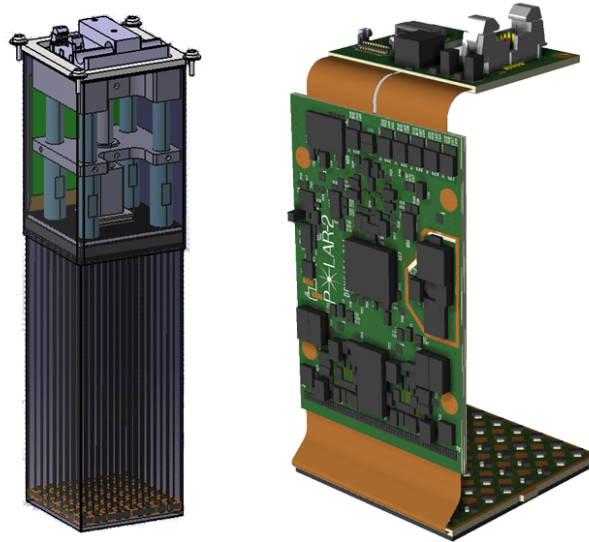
CAD model of a single polarimeter module (right), and of a Front-End Electronics Board (left) instrument [2]
